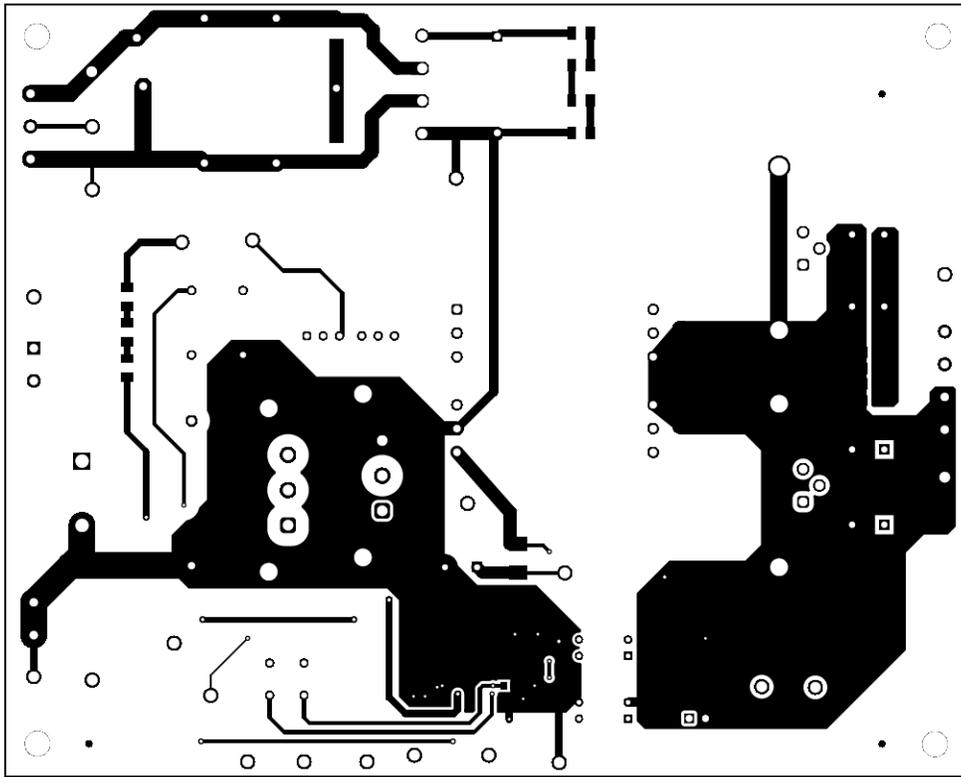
UCC25630-1EVM-291 Top Copper (Top View)
